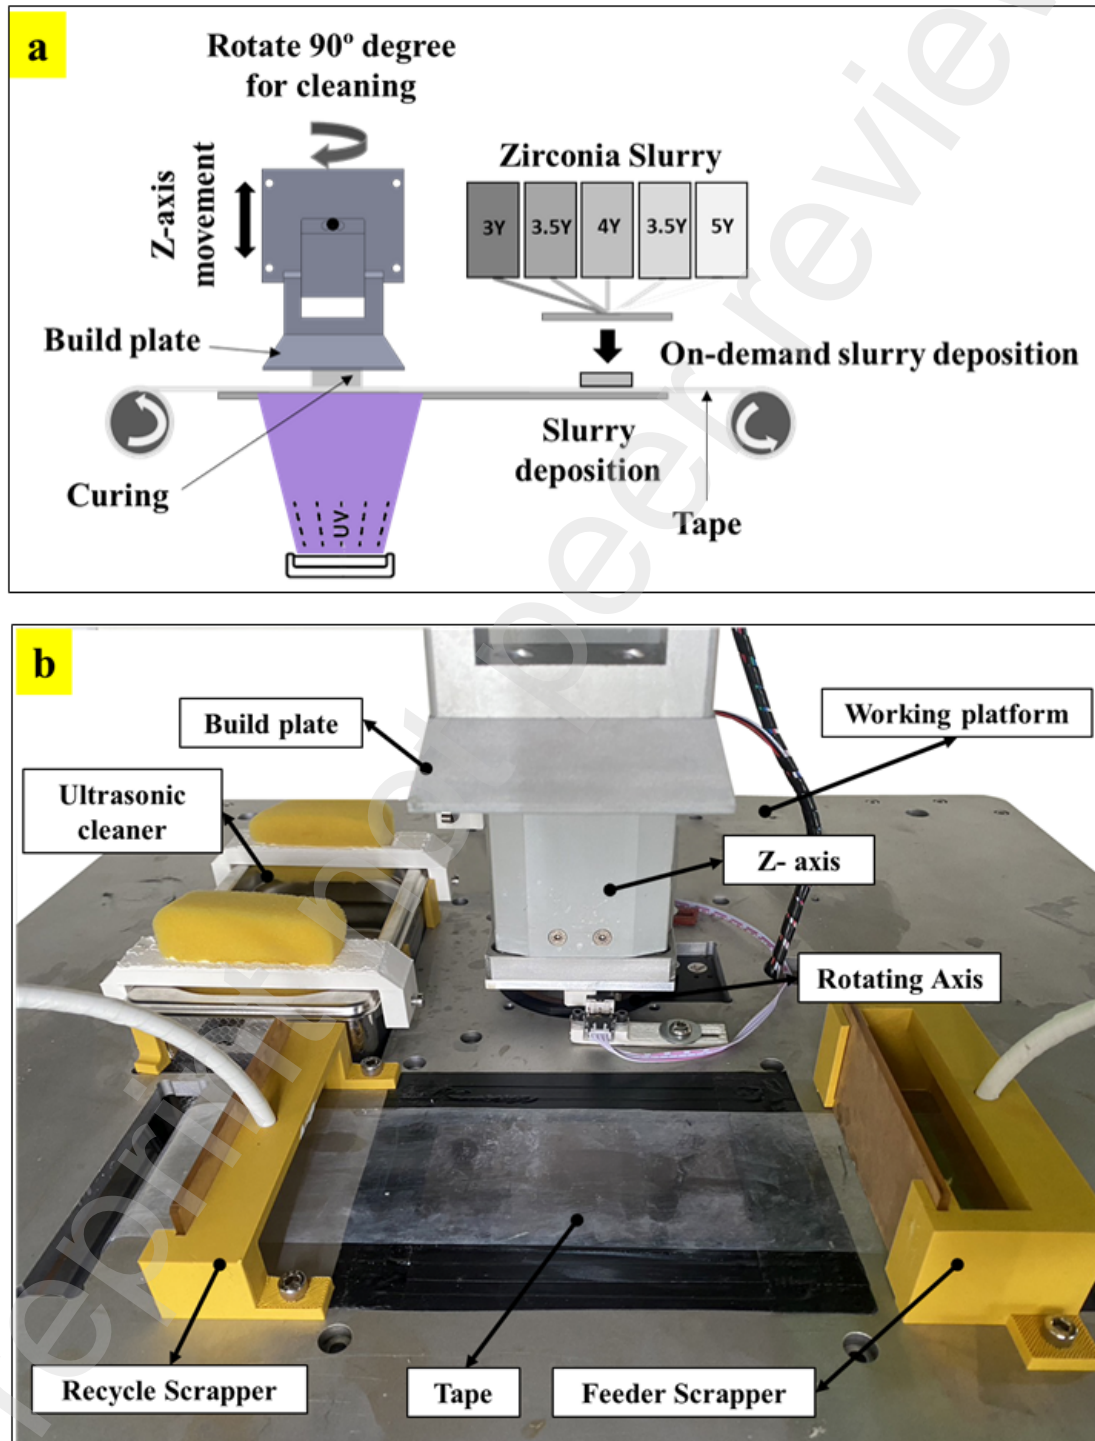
Multi-slurry tape-casting 3D printing: (a) working principle (b) components
